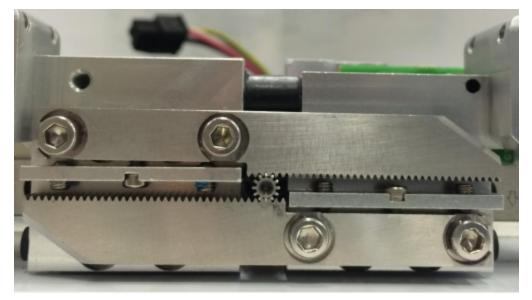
Gripper Racks Centered in Fully Closed Position
